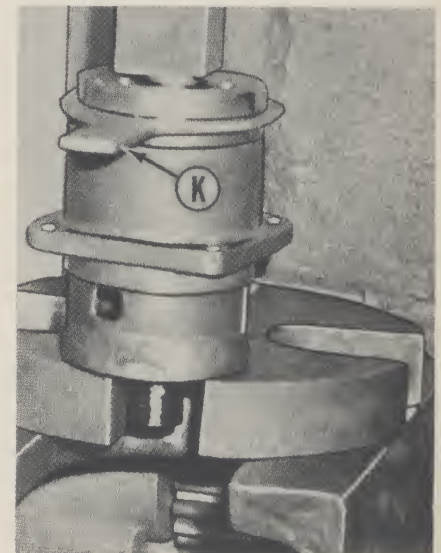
Oil seal (21) assembled to shaft (14) is installed into (18) as a single unit using split collar (K) or keystack as shown.
